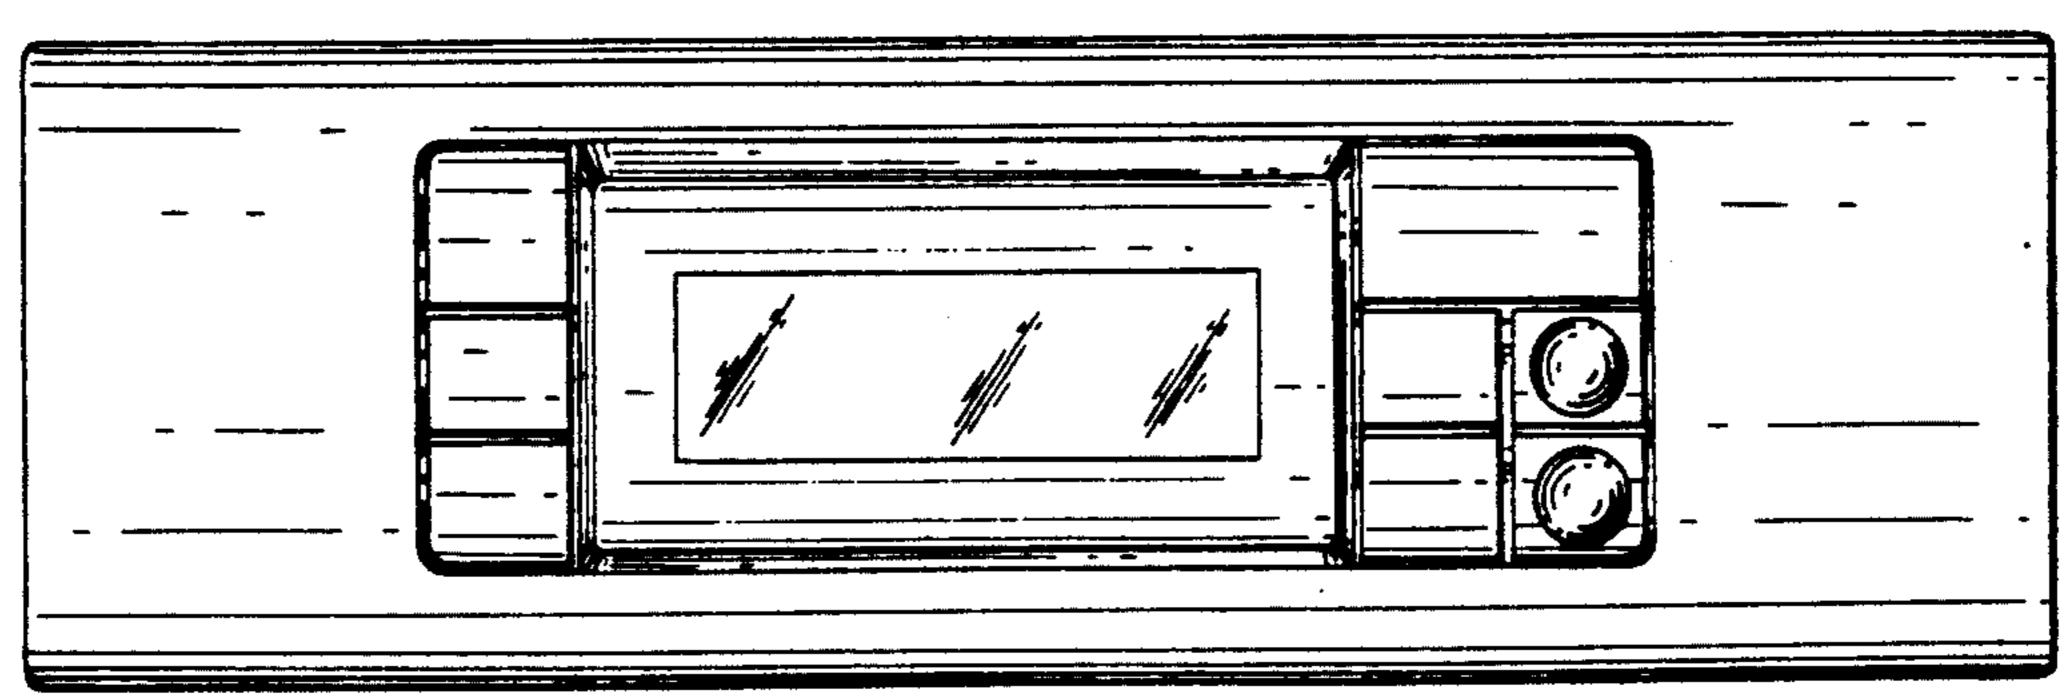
is a top plan view of my design, to which there is a mounting plate provided;
